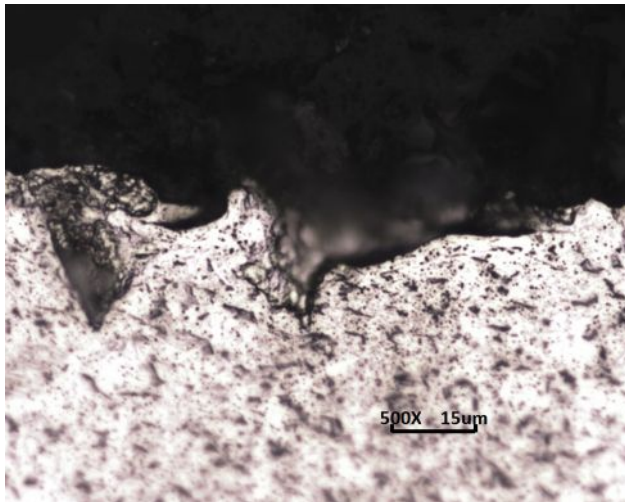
a defective surface for dry cutting using tool wear level 0.8 mm
